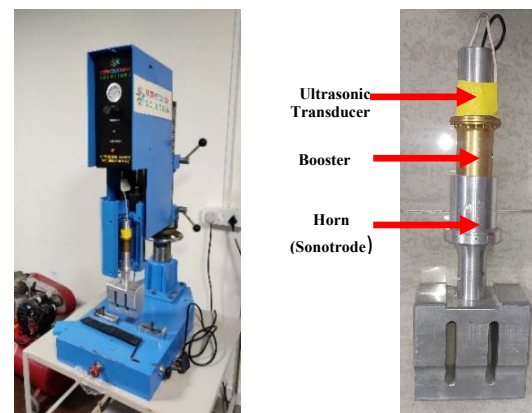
Ultrasonic Welding Machine used for experimental trials
